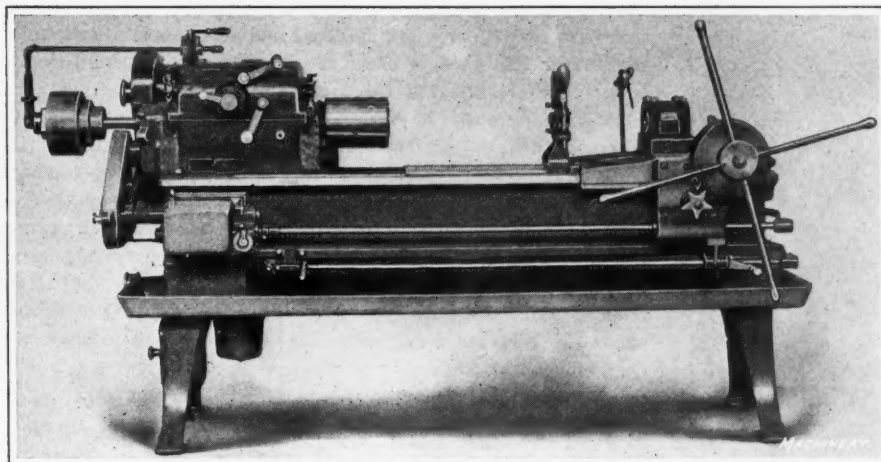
14-inch Geared-head Lathe of Simplified Design built by the Springfield Machine Tool Co.
